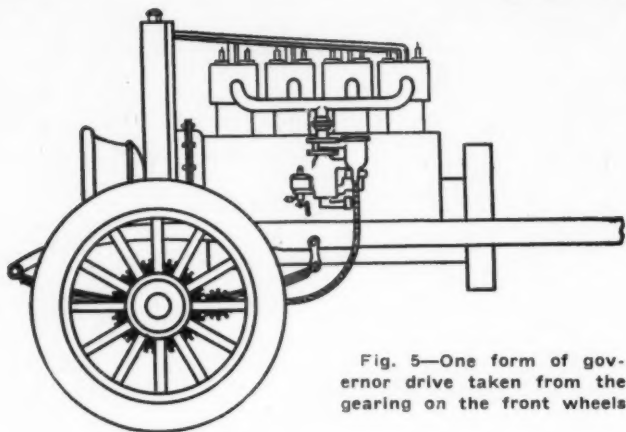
One form of governor drive taken from the gearing on the front wheels
